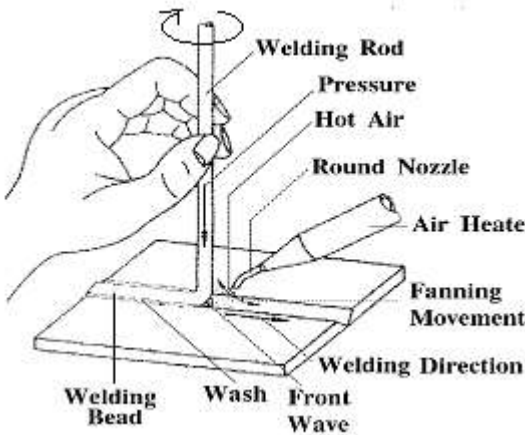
Schematic of hot-gas welding, showing the correct position of torch and filler rod for different thermo-plastic.
